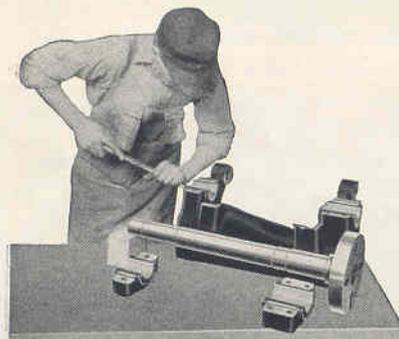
The phosphor bronze bearings for the headstock spindle are hand scraped to fit the spindle.
